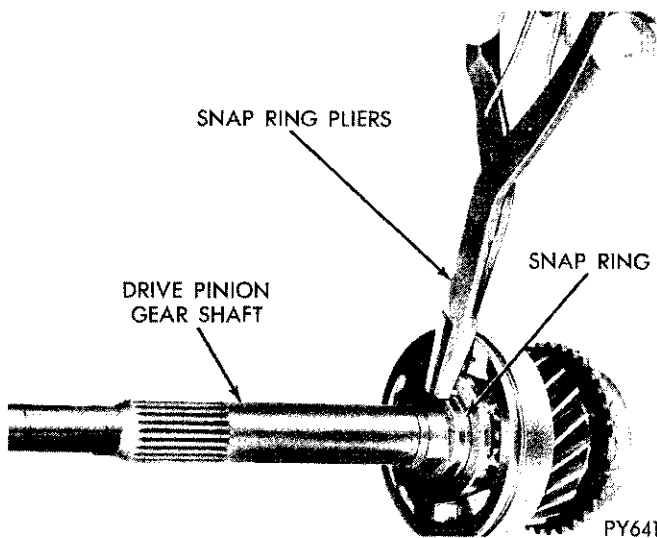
Snap Ring, Pinion Shaft to Bearing—Removal or Installation
